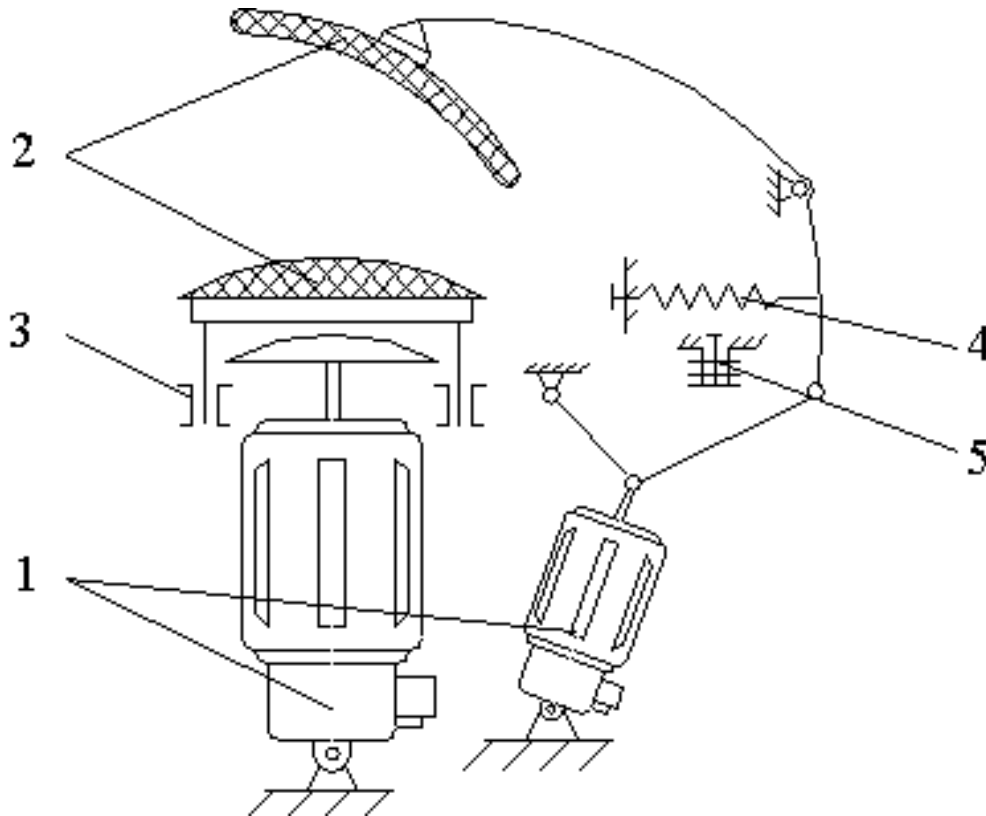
Scheme of an ironing press based on a hydraulic pusher: 1 – hydraulic pushers; 2 – ironing pillows; 3 – guides; 4 – return spring; 5 – limit switch-locker
